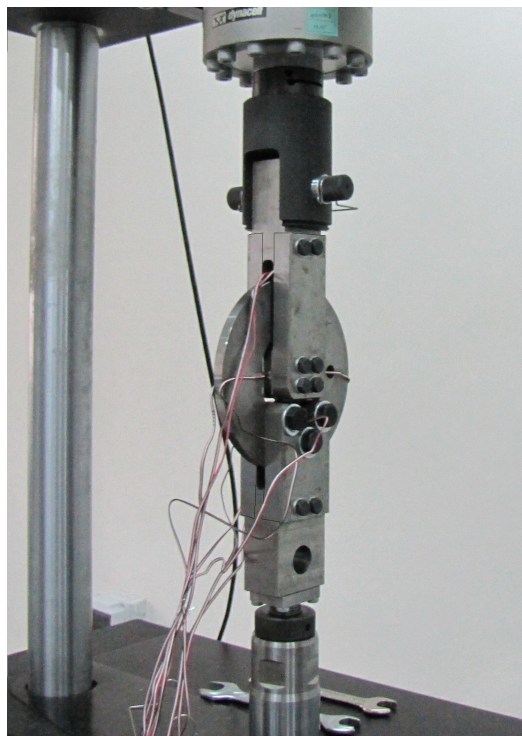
Assembly of the modified fixture on the tensile testing machine.
